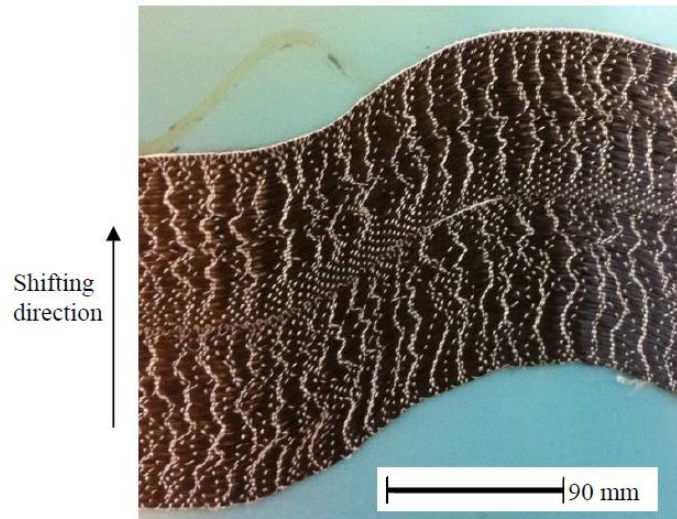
Unidirectional non crimped fabric steered by a CMTS head [40].
